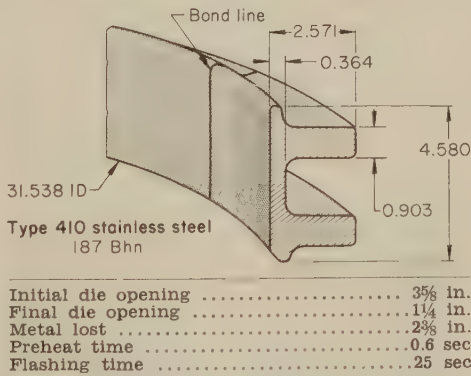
Section of a jet-engine rear-mount ring that was made by flash welding a stainless steel extrusion rolled into a ring (Example 440)
